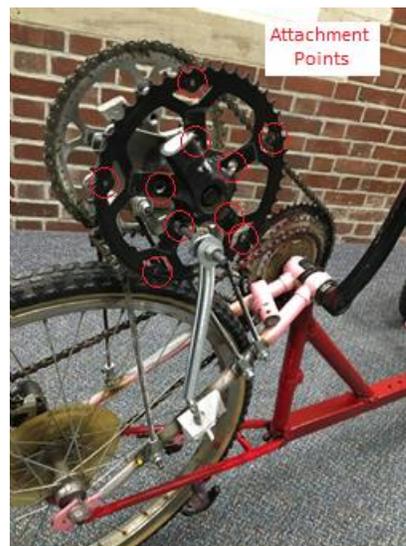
Attachment of spring to sprocket, detailing limited number of attachment points
